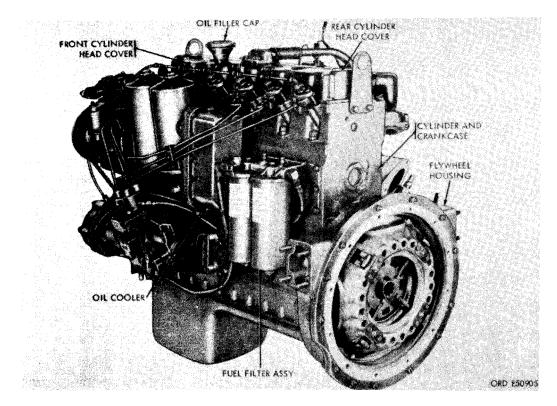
LATE MODEL LDS-427-2 ENGINE ASSEMBLY - 3/4 LEFT REAR VIEW.
